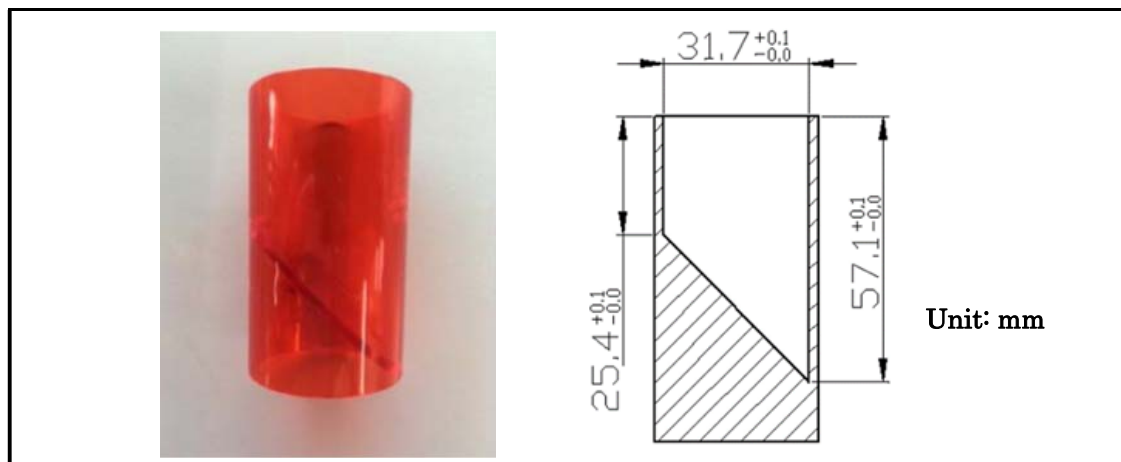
Small parts cylinder (Left: picture, right: drawing)
